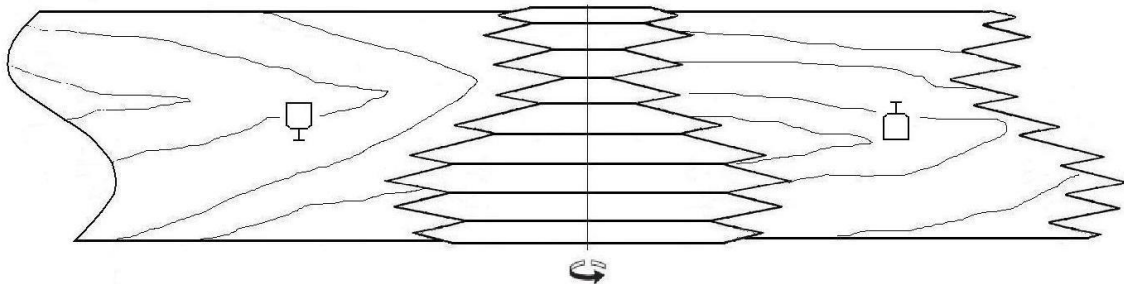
Simultaneous milling fingers by one cutter at the ends of two adjacent workpieces
